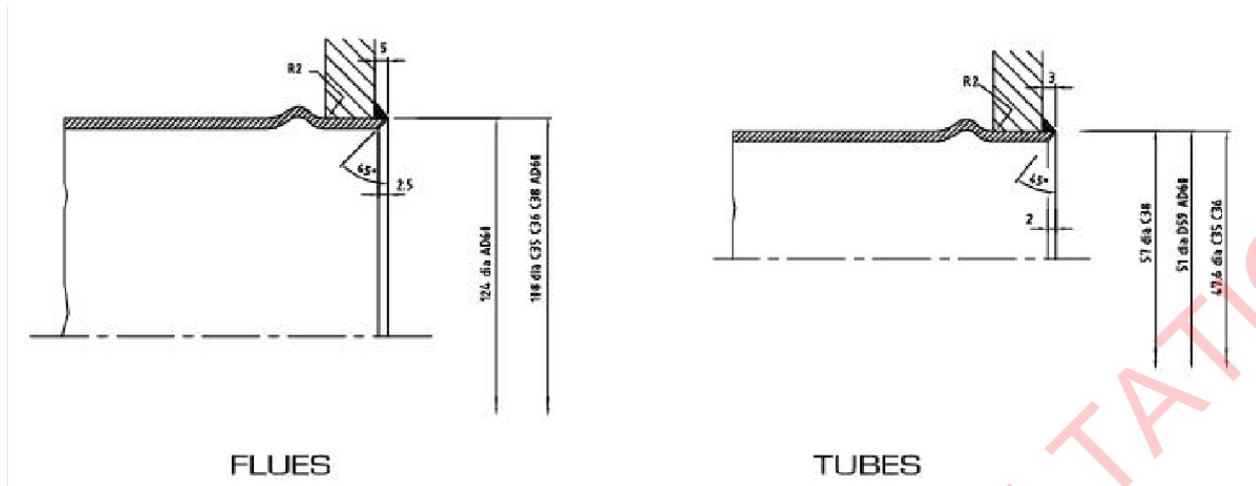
NSW Government Railway tube welding practice for non-beaded tube ends
